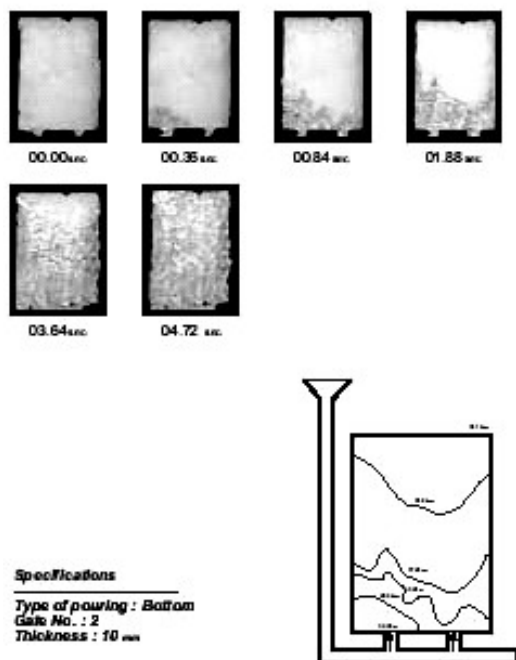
Mold filling behavior in the bottom gating system with 10 mm thickness.
